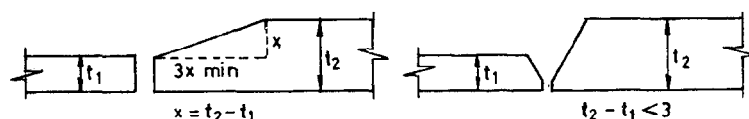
BUTT WELDING OF PARTS OF UNEQUAL THICKNESS
